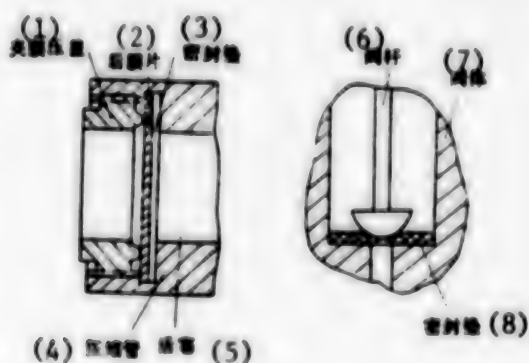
Diaphragm Fixture and Exhaust Valve Sealing
